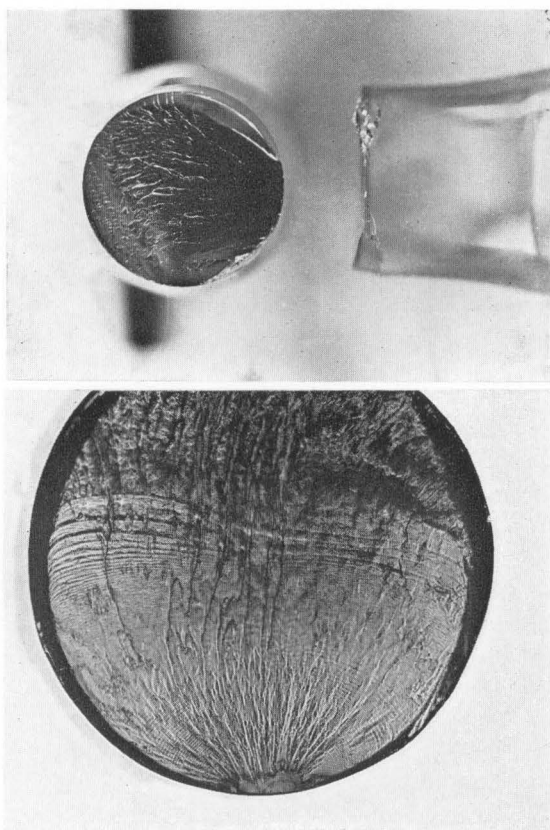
Necking zone hemming tension-type fracture zone in rotating bending
